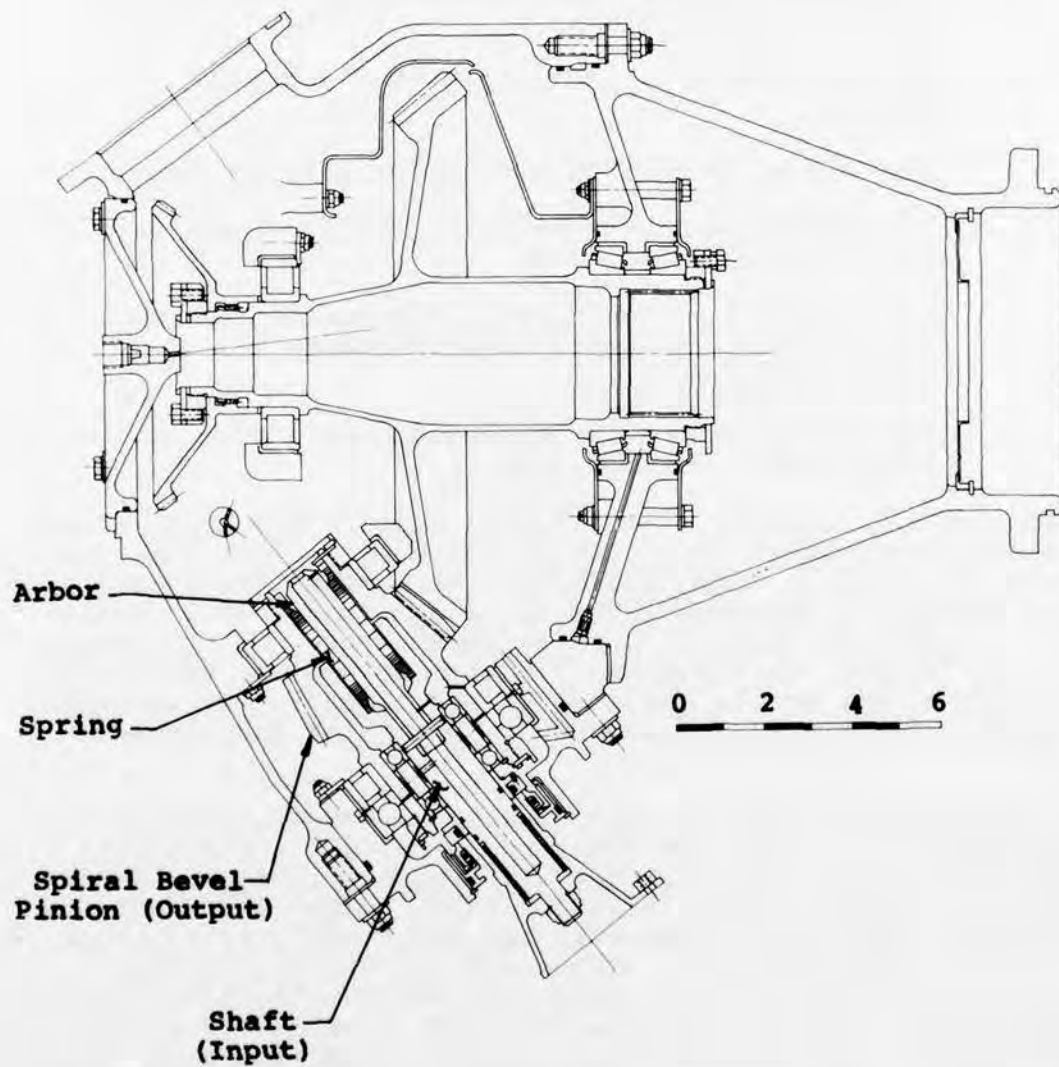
Input Module With Spring Clutch at 20,900 rpm.
